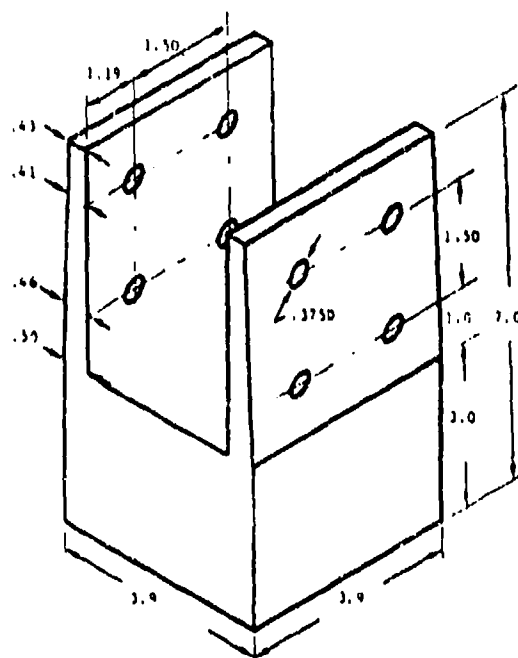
Dimensions of the Critical Skin Tab and the Fuselage Attachment Frame.
